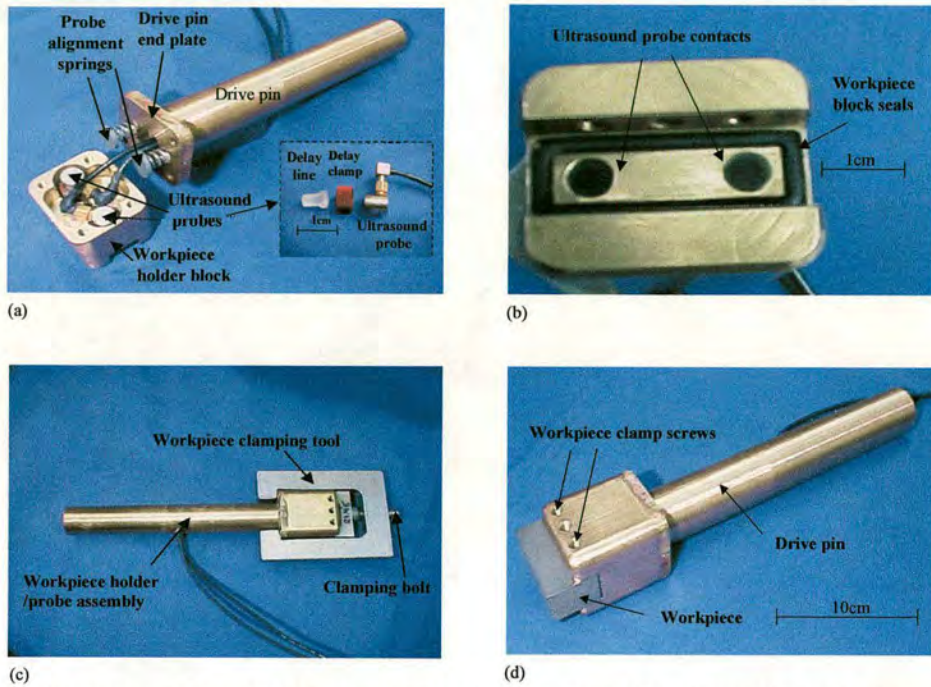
Views of Cell 2000 workpiece/drive pin assembly illustrating; (a) internal view of workpiece block showing encapsulated probes, (b) probe contact points and block seals, (c) procedure for workpiece clamping, (d) completed assembly.
